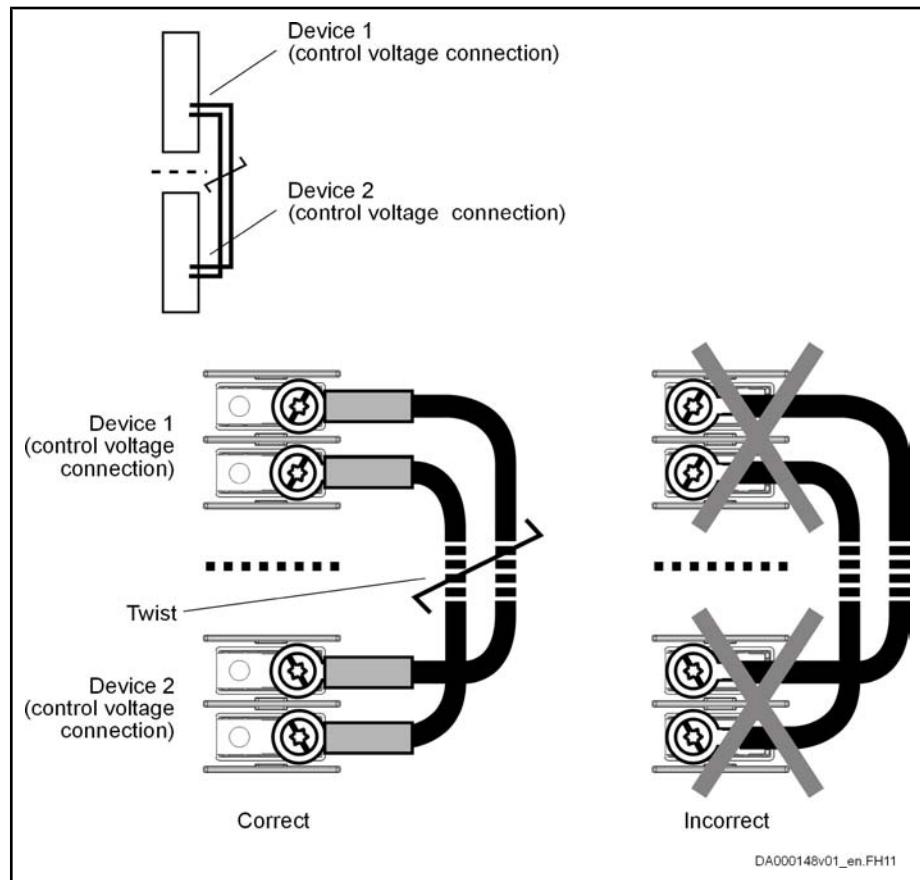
Control Voltage Connections for Cable Routing to the Right
